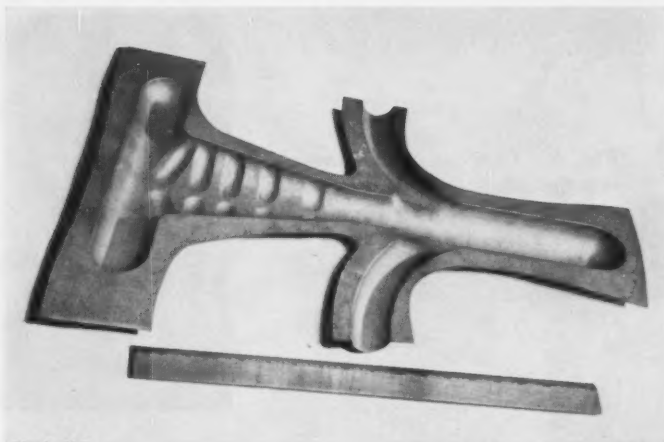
Aluminum-alloy part produced in two operations with the same tooling, plugs being removed from the male die for the second strike
